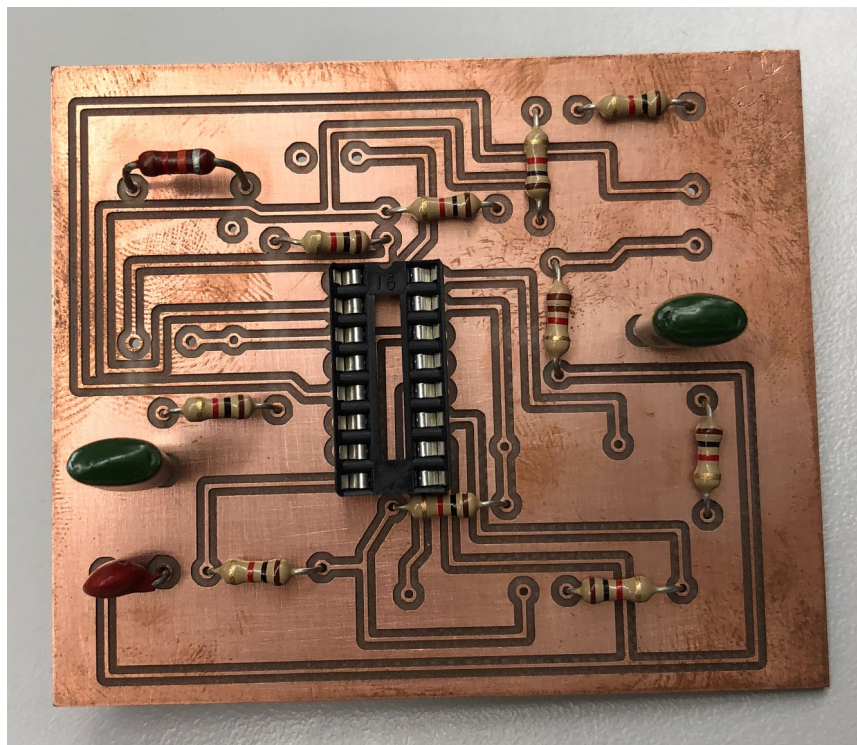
Physical PCB with components. The quad op-amp integrated circuit would sit in the dual in-line package socket, but is not shown in the image.
